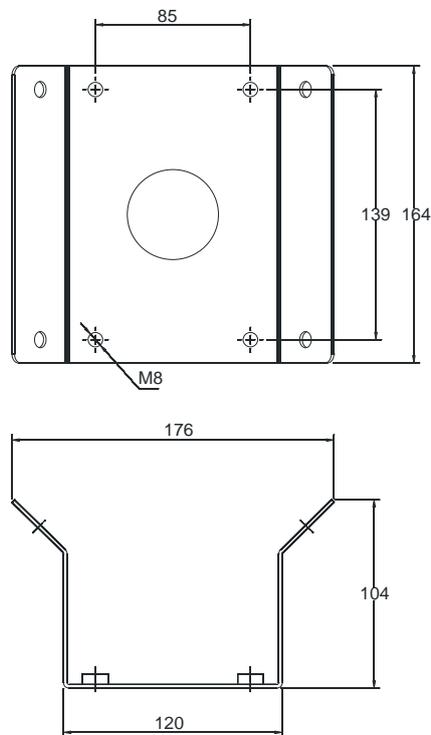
Picture of dimensions of external wall angle installation arm
